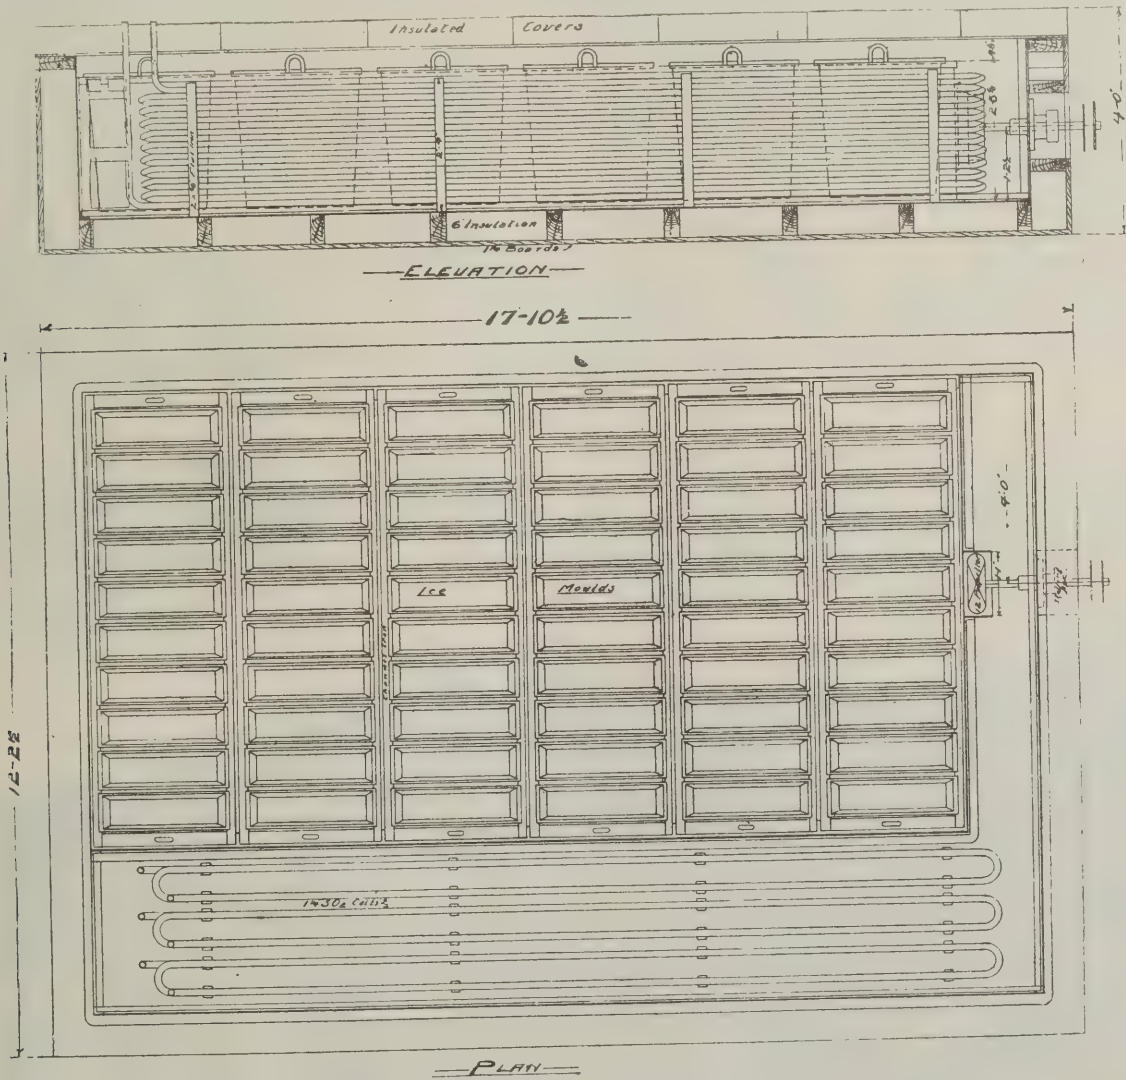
THREE-TON ICE-MAKING TANK WITH ONE CWT. MOULDS.
